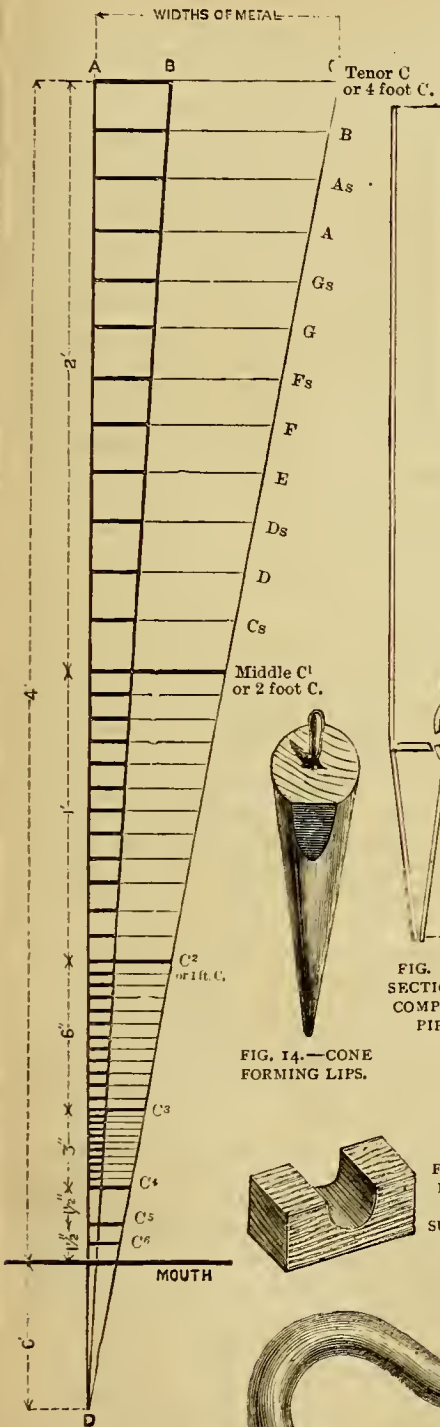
SCALE OF PIPES AND SIZE OF METAL REQUIRED TO MAKE THEM.
